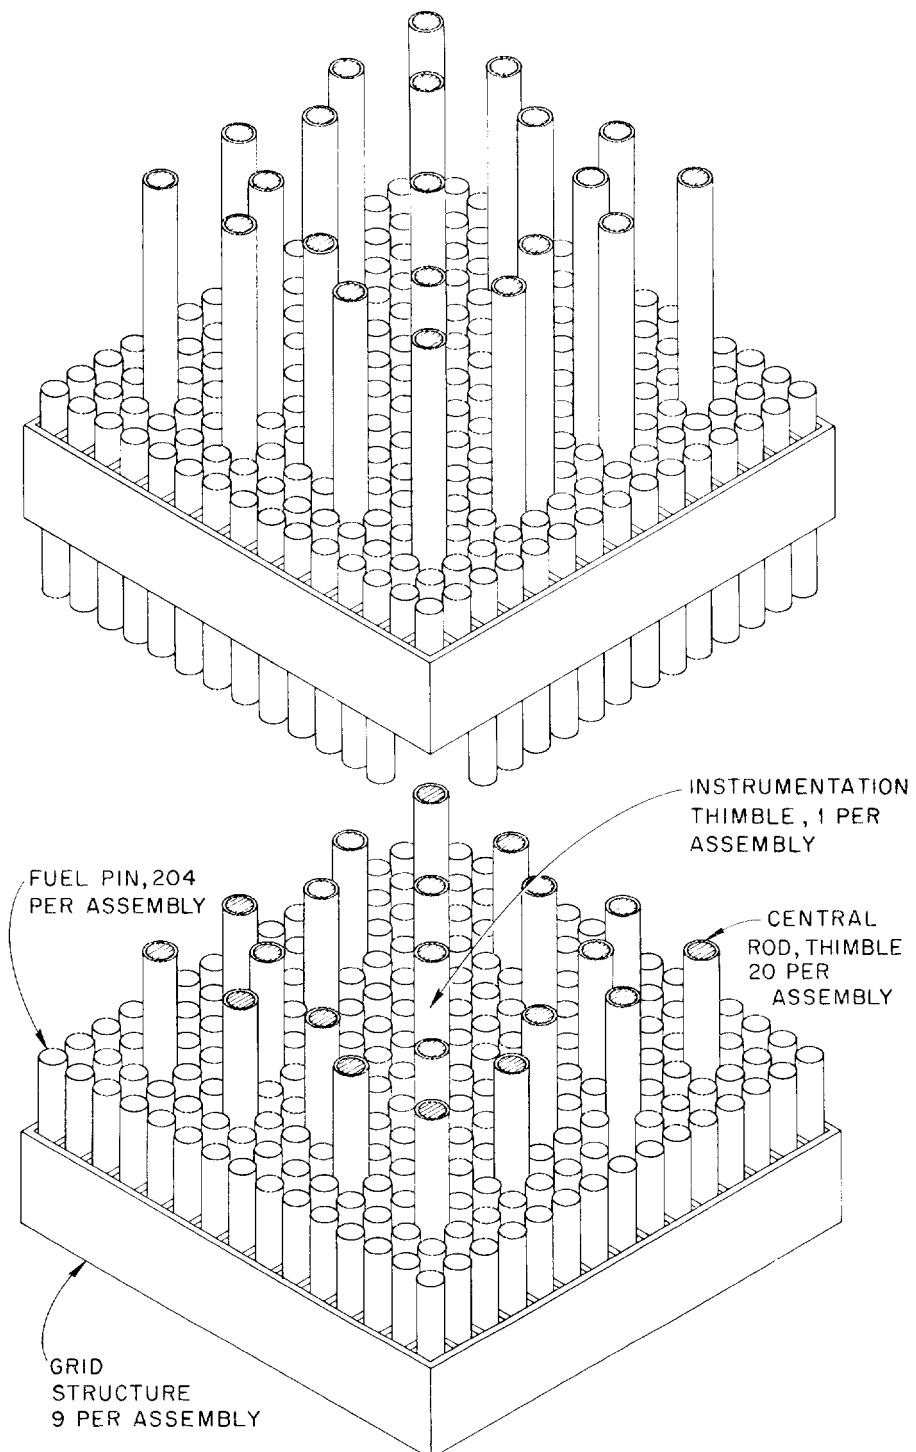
An Isometric View of the Reference PWR Fuel Assembly
